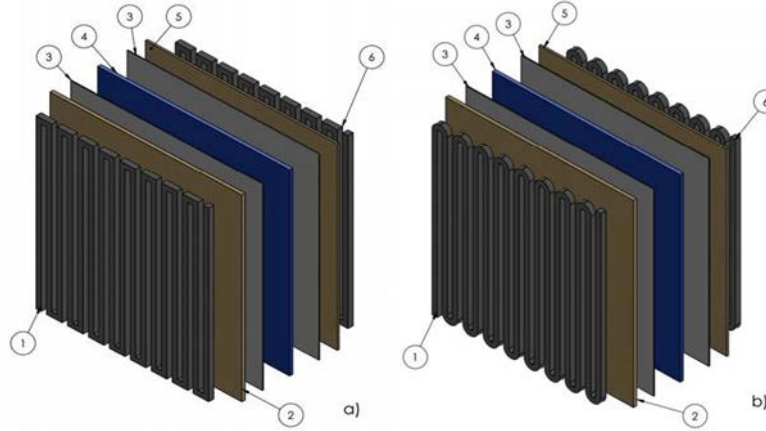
Isometric view of a cell PEM a) 90° elbow serpentine shape, b) radial elbow serpentine shape.
